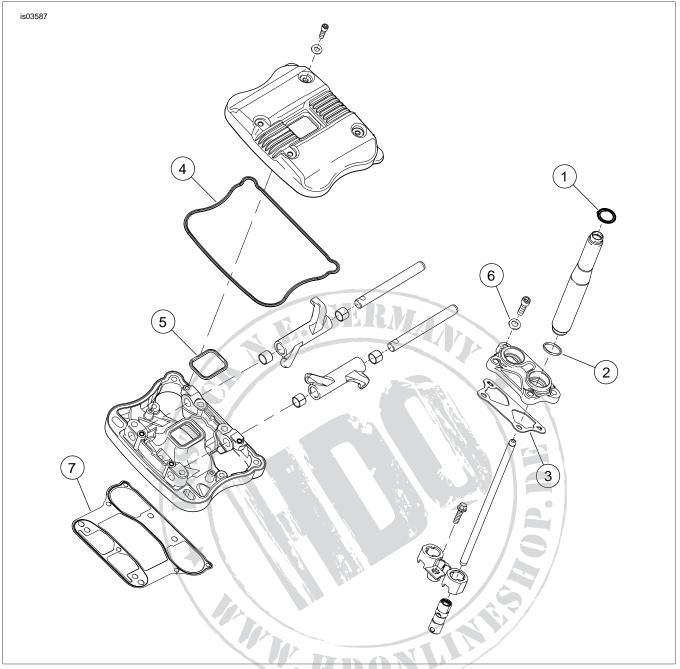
Service Parts: Screamin' Eagle XL 883 to 1200 Stage 1 Conversion Kit
